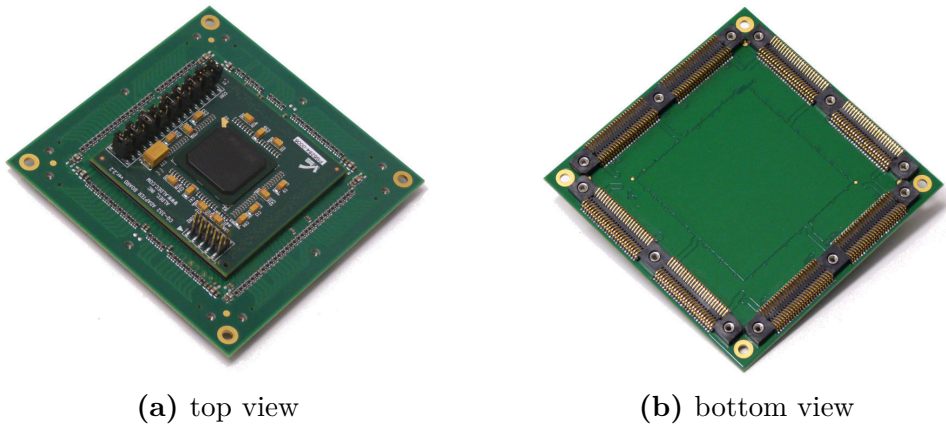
The Aldec Adapter Carrier Board. (a) Shows the Aldec Adapter soldered onto the top side of the Carrier Board. (b) Shows the connectors on the bottom side, which make the Carrier Board pluggable.
